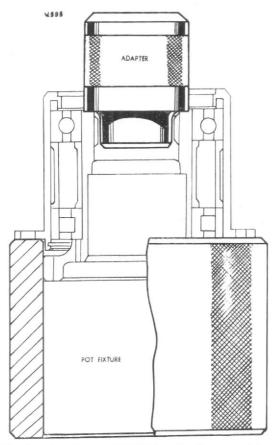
Pot fixture T.77740 and adapter T.77741 for pressing the upper driving gear and inner roller race out of the housing.
